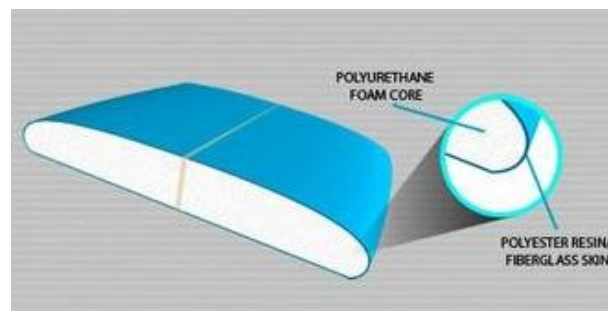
Polyurethane Surfboard Construction (Schultz, Surfboard Construction, 2011)
